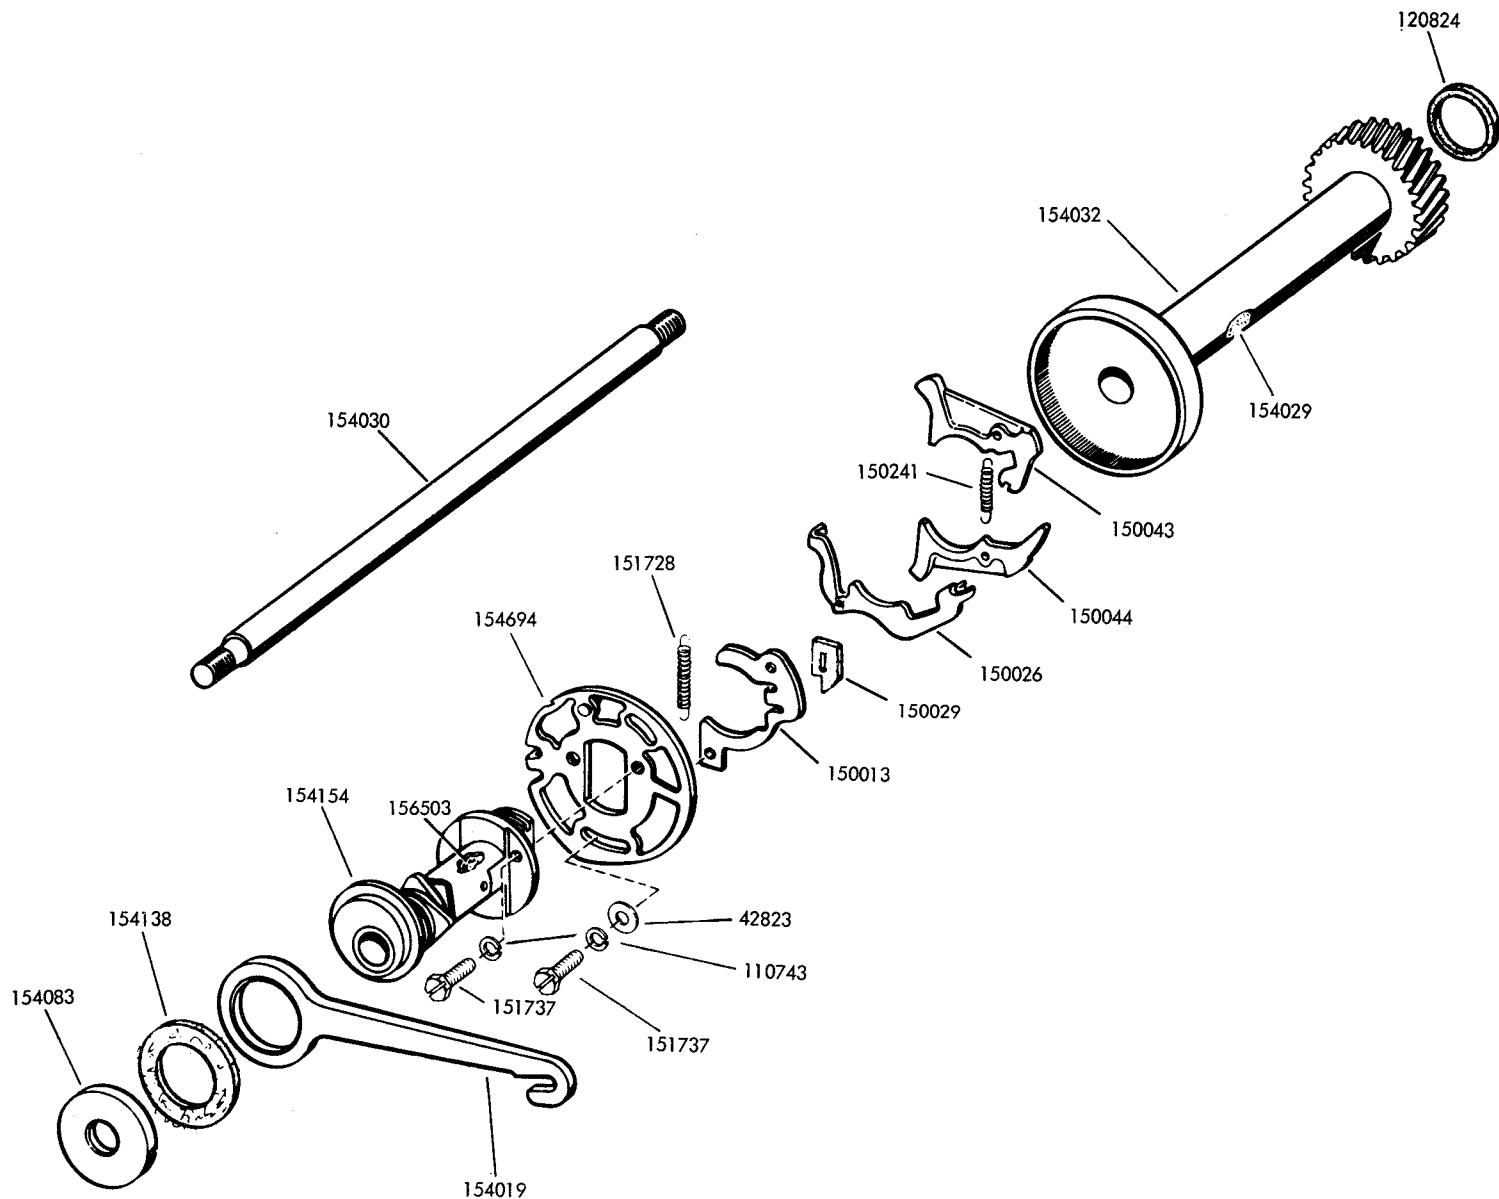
SIGNAL GENERATOR SHAFT MECHANISM
